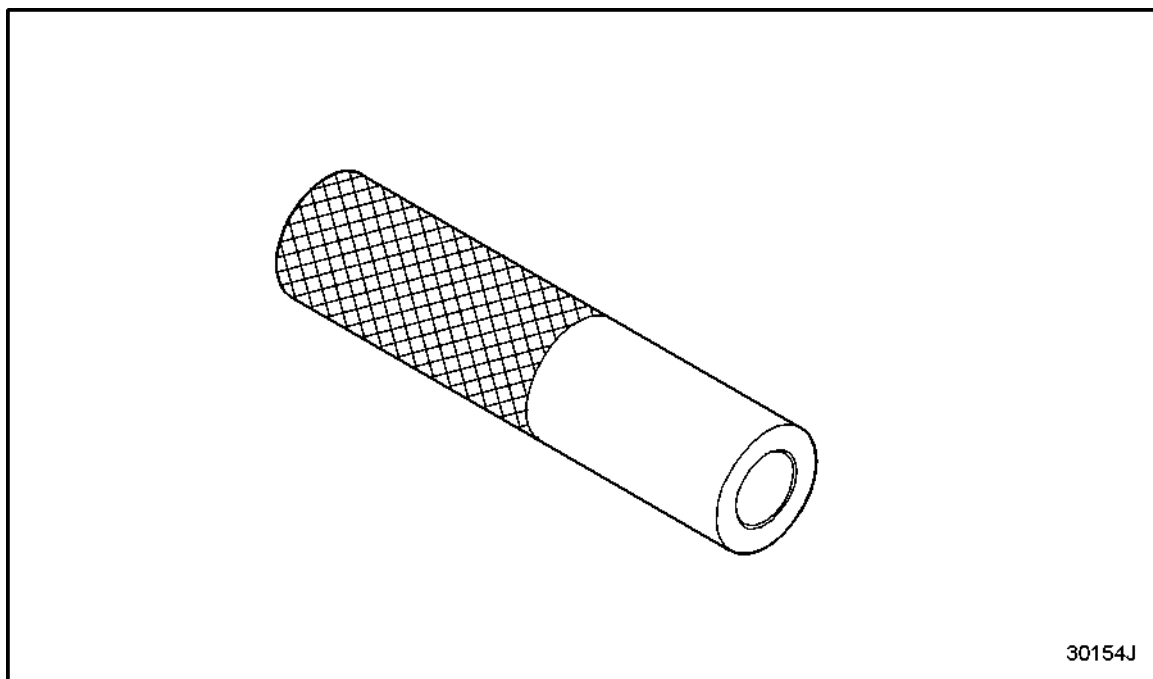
Valve Guide Installer (2 Valve),J 9530
